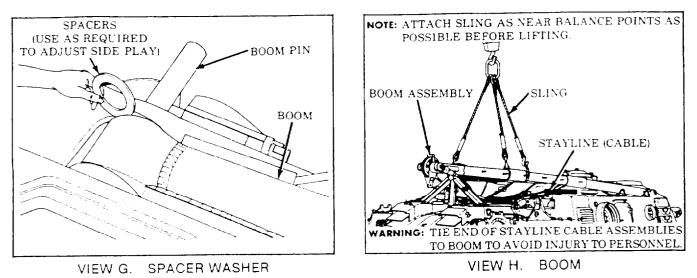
Hoisting boom removal and installation (Sheet 2 of 2).
